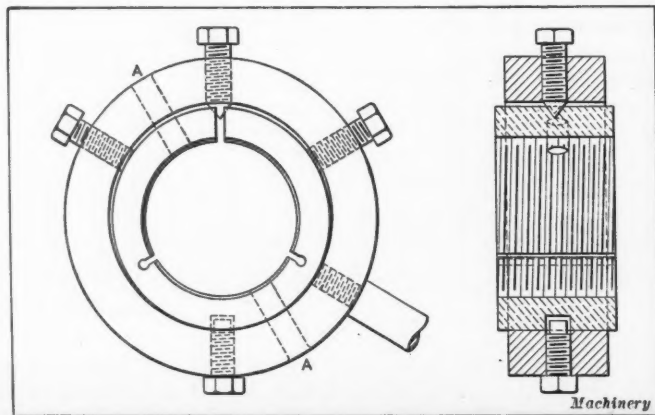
Lap-holder and Lap for Use on Thread Gages
